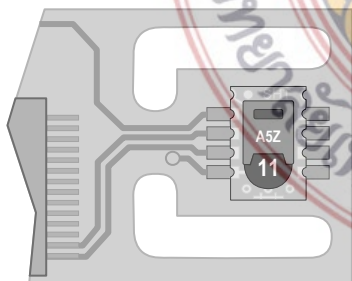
Top view of example of mounted SHT1x with slits milled into PCB to minimize heat transfer.
